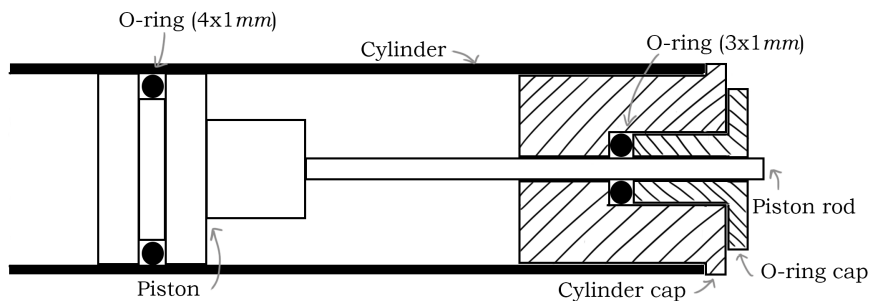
Schematic cross-section drawing of the O-rings placed inside the piston-cylinder. Two O-rings are used, namely one of $4 \times 1 \text{ mm}$ and $3 \times 1 \text{ mm}$.
